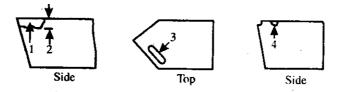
Common types of tool failure 1. Flank wear, 2. Wear land, 3. Crater, 4. Chipping.
